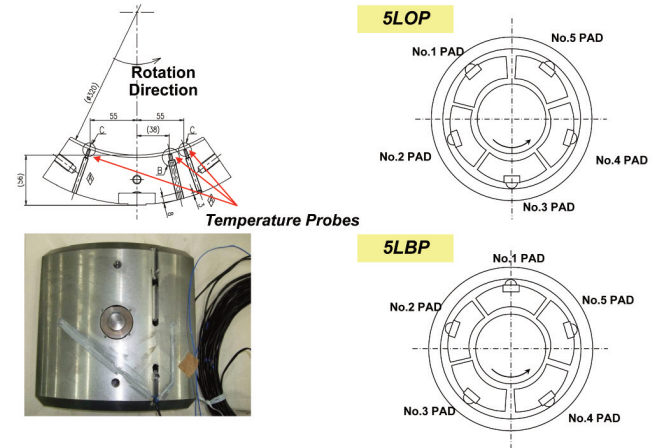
Large Size Journal Bearing and Pad Temperature Measurement Location.
